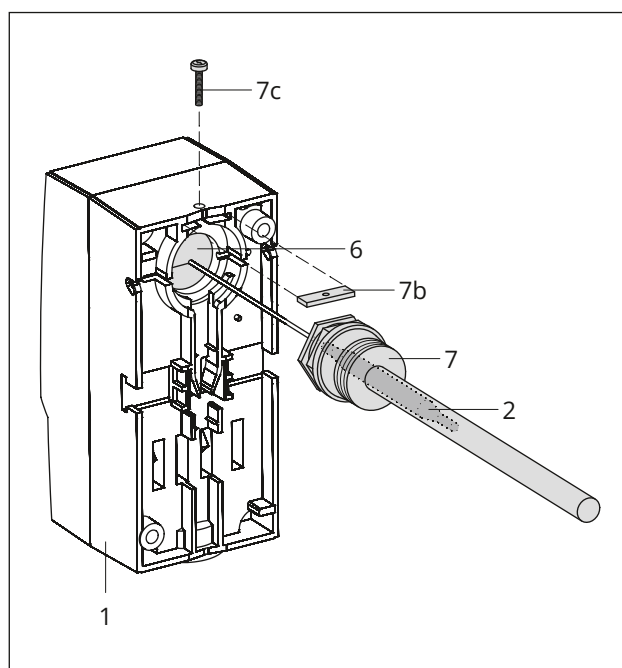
Wall mounting · Capillary tube in the thermowell
